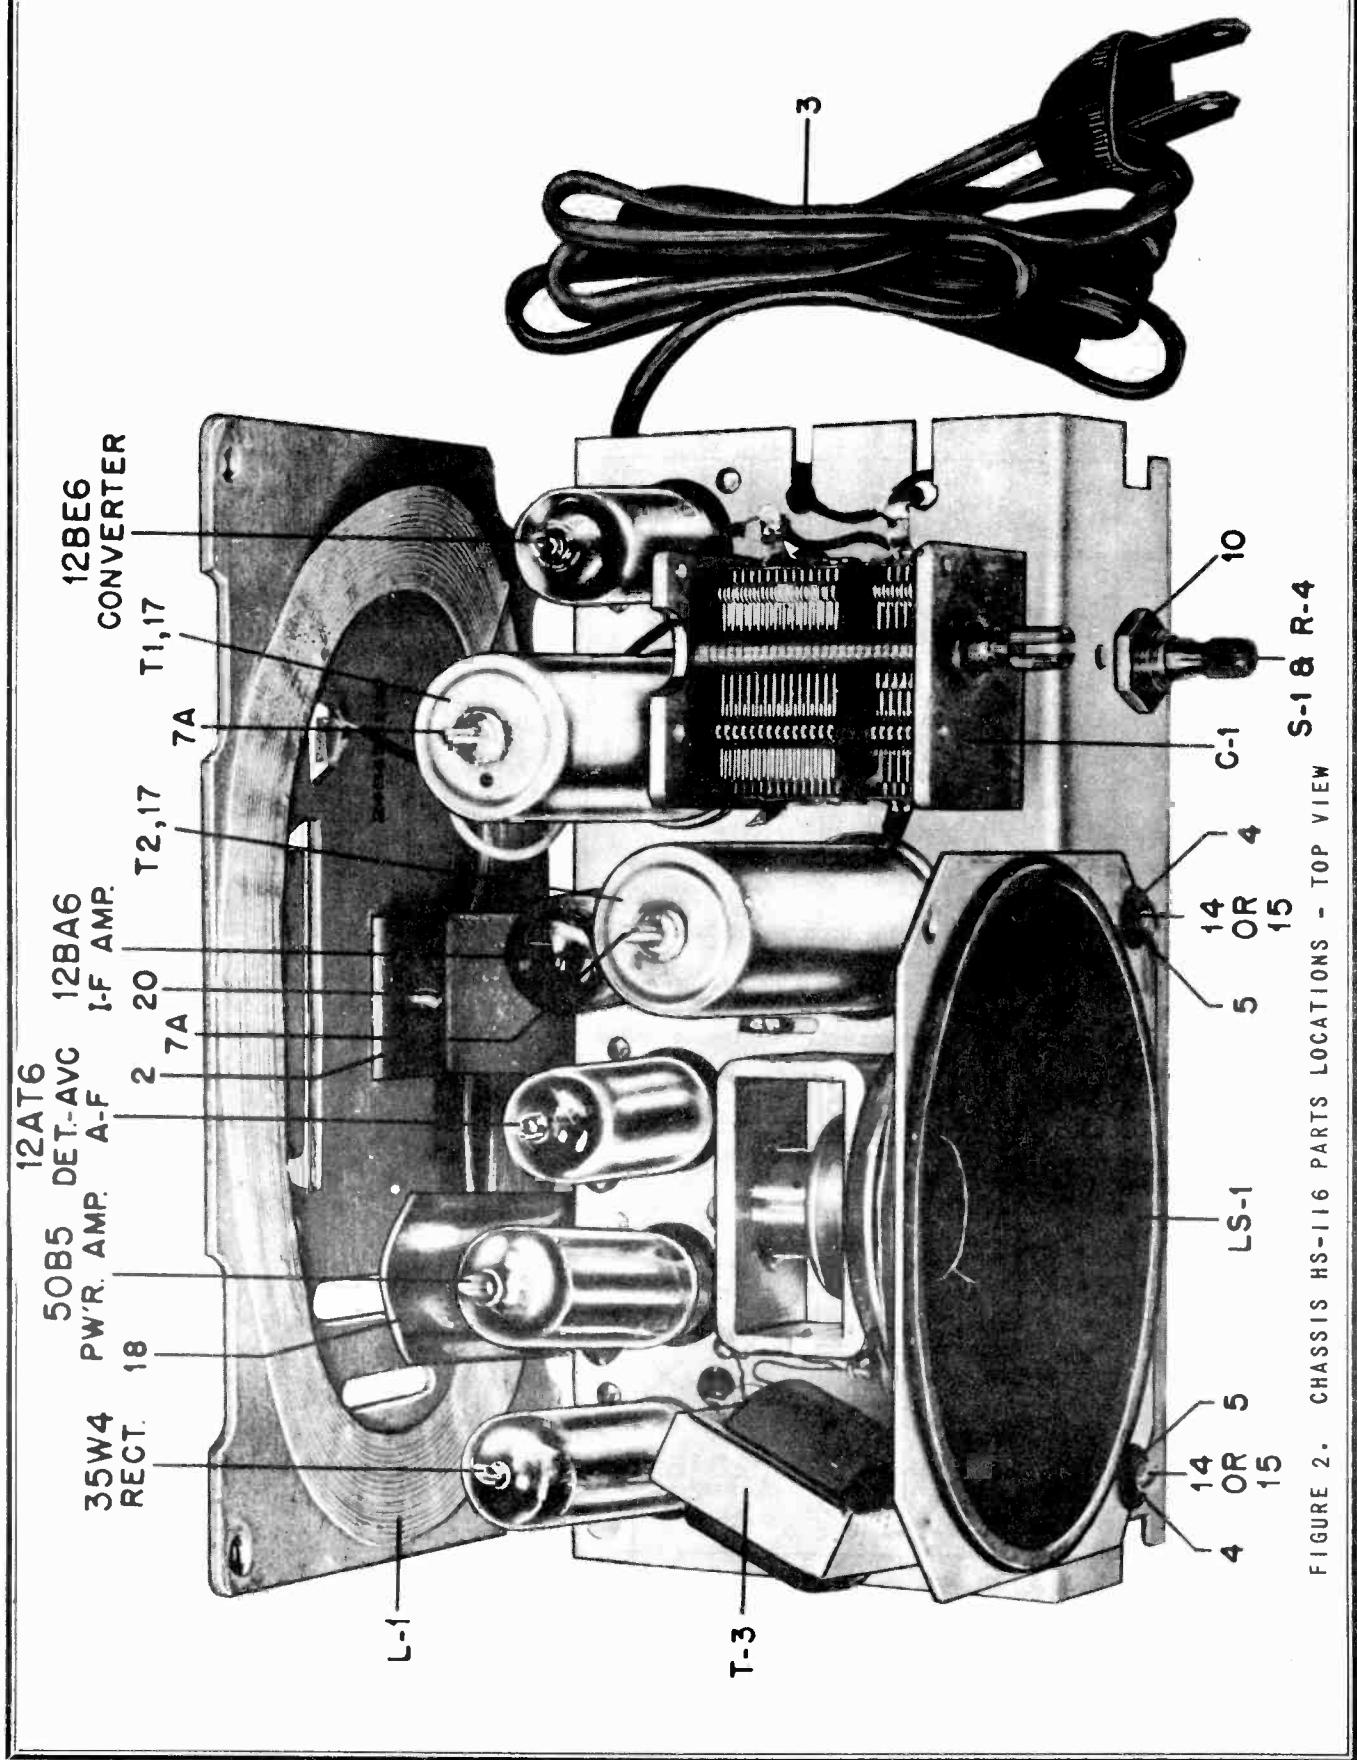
CHASSIS HS-116 PARTS LOCATIONS - TOP VIEW S-1 &amp; R-4
